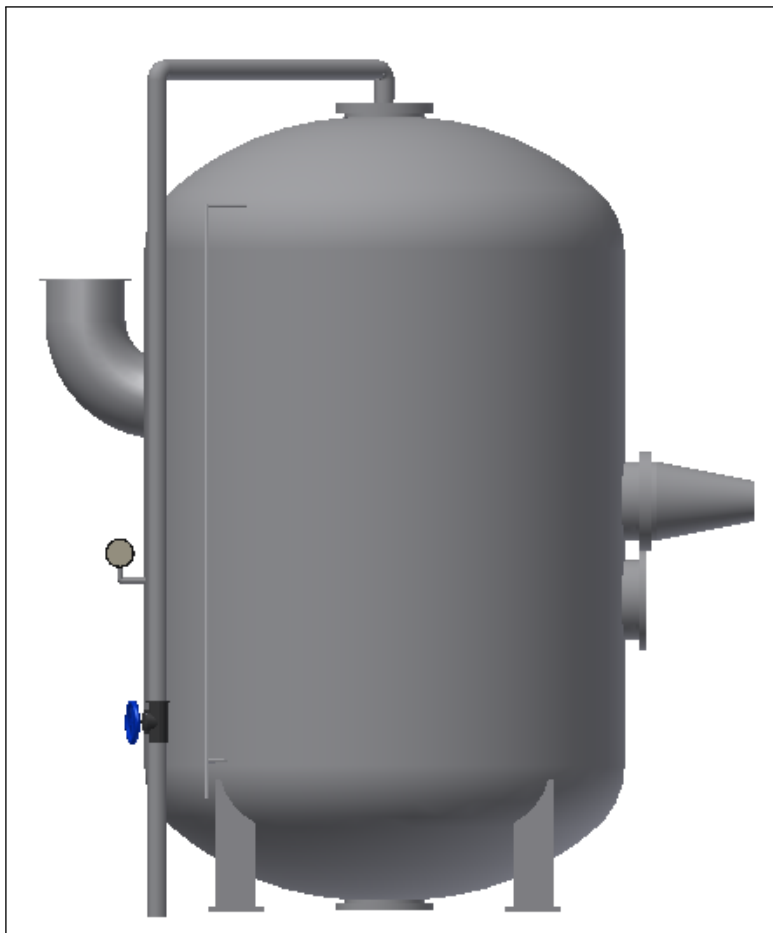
3D CAD drawing of the suggested design of the pressure tank with inlet, two outlets, water level pipe, pressure gauge, and venting pipe. The safety valve is not in the figure.
